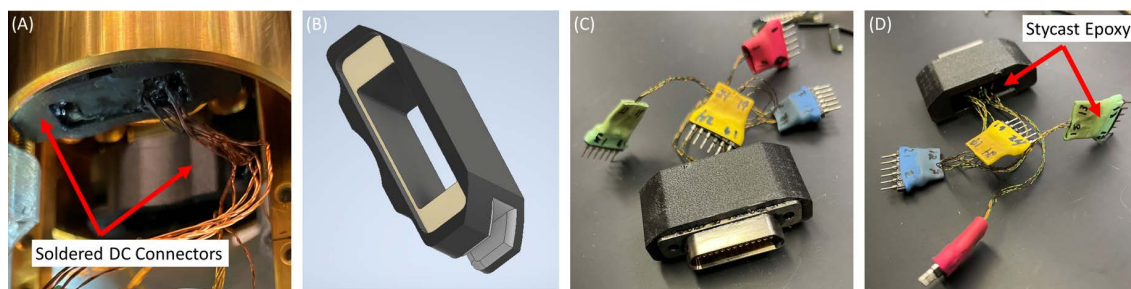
(A) Image of the bottom of probe head. The black connectors shown here are designed to protect the solder joints on the 25-pin Micro D-Sub breakout connectors. (B) A 3D CAD depiction of this custom adapter. This adapter is printed using Onyx. After the 25-pin Micro D-Sub socket connector has been soldered, it is placed inside of the inset shown here. Then the back of the adapter is filled with Stycast epoxy to secure the solder joints. (C, D) An old version of this breakout connector. This adapter used the wrong wires. We found that the 36 AWG twisted-pair wire is too brittle and often cracks inside of the cryostat. Only use the 32 AWG single strand wire.
